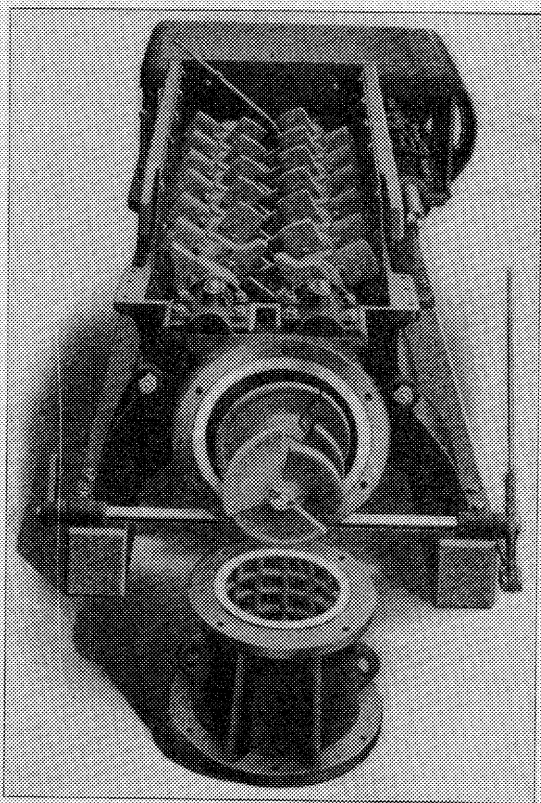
A—Combined Double-Shaft Pug Mill and Auger Machine.
